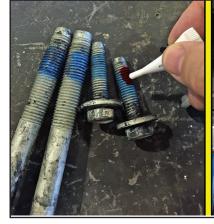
Apply thread locker to the factory bolts and carefully reattach the rack and pinion to the frame reusing the four bolts; tighten. (Driver Side -162) (Passenger Side -74) {Driver Side 24mm, Passenger Side 18mm}
